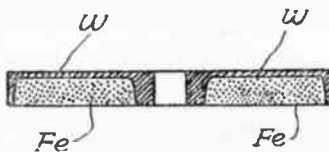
C.—Similar moulding to 34A with cavities filled with molecular iron core.
